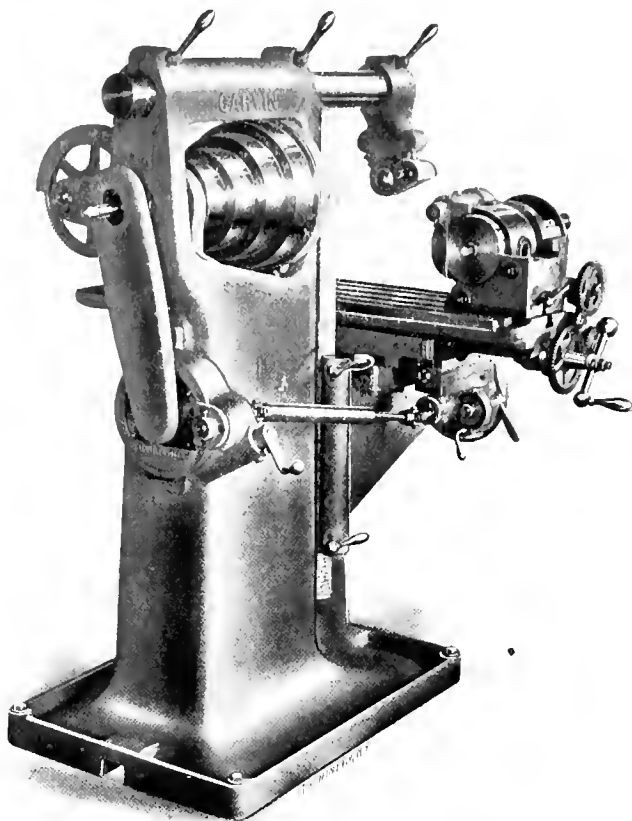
Rear View of Milling Machine, showing Feed Gear-box and Connections
